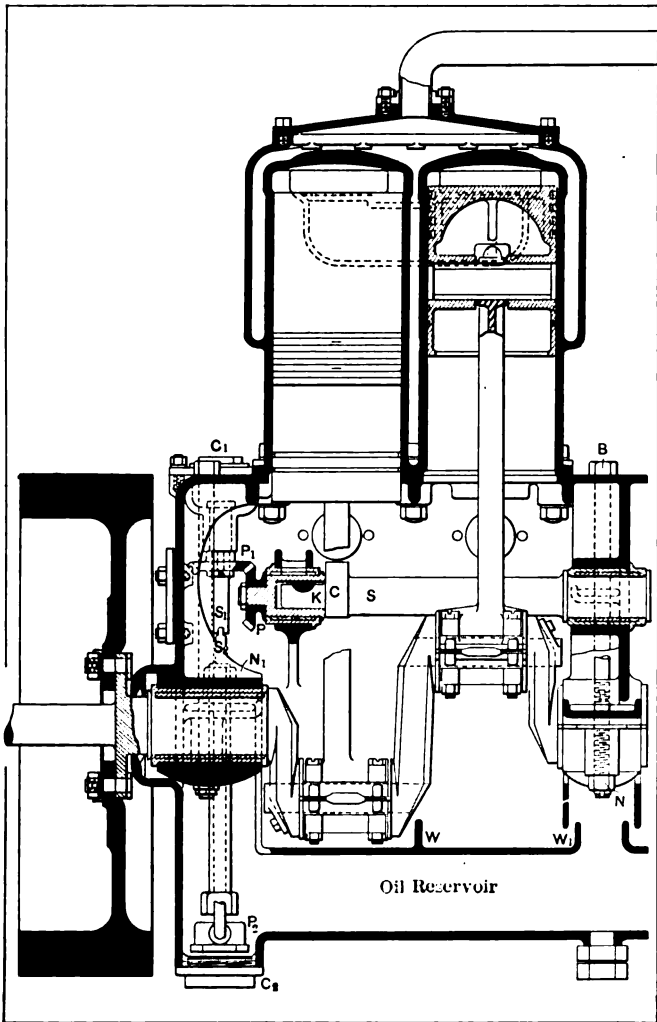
Section of two rear cylinders, showing cam and crankshafts
